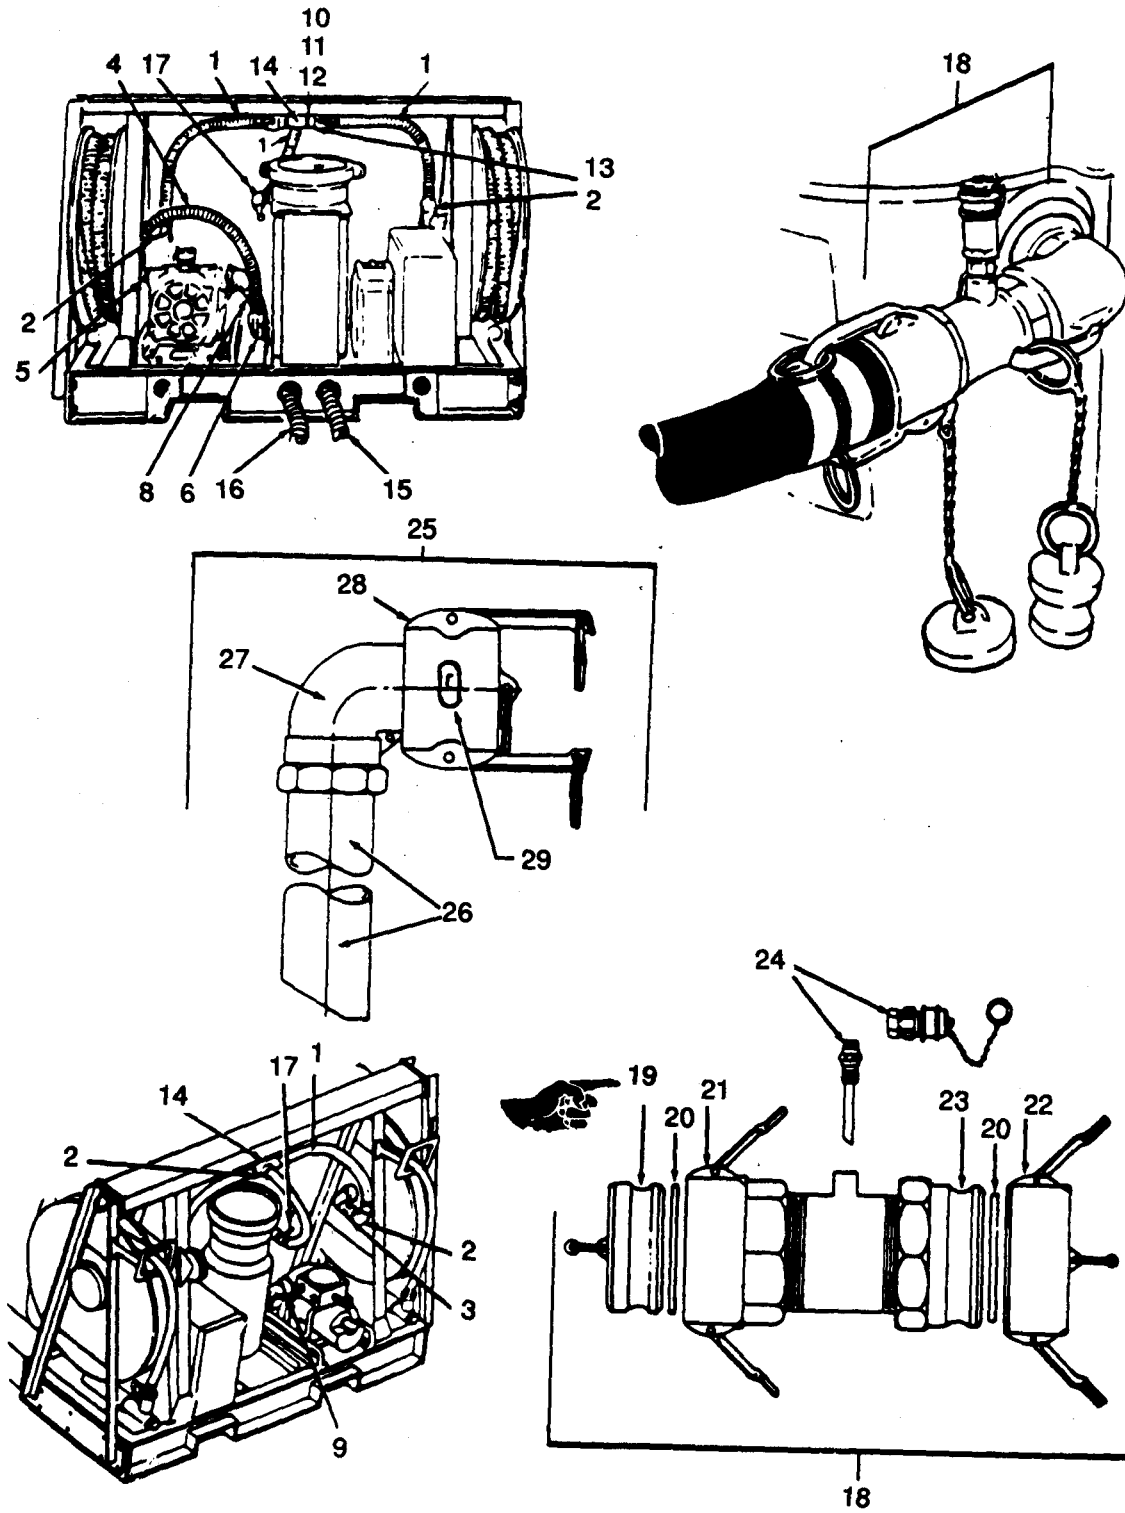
Hose Assemblies, Elbow and Tee Inlet and Outlet (Sheet 1 of 2).
